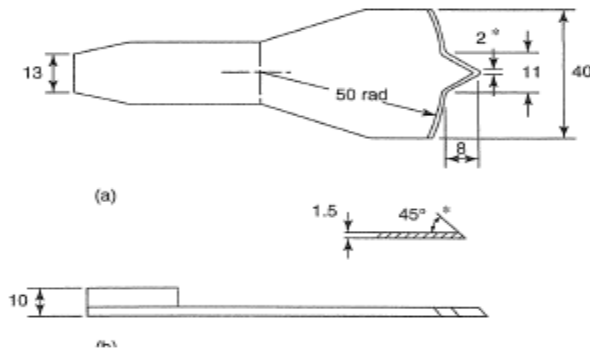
Grooving tool for Casagrande apparatus (dimensions in mm)
